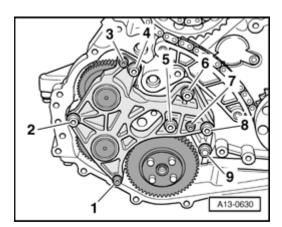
Rear Bearing Cap Bolts Tighten Sequence
